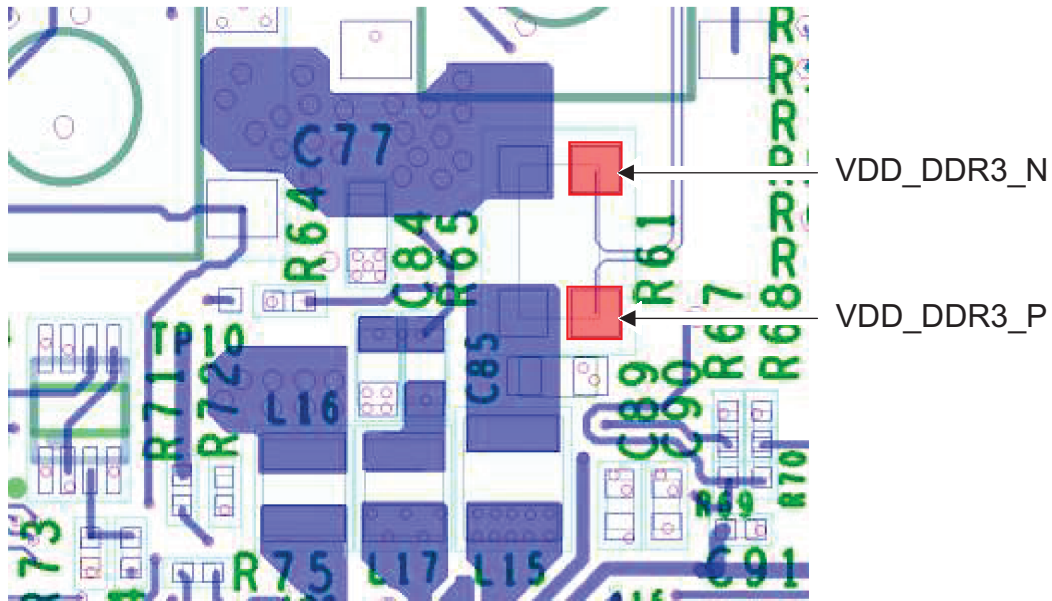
DDR3 Current Measurement Probe Points (Top Side of PCB)
